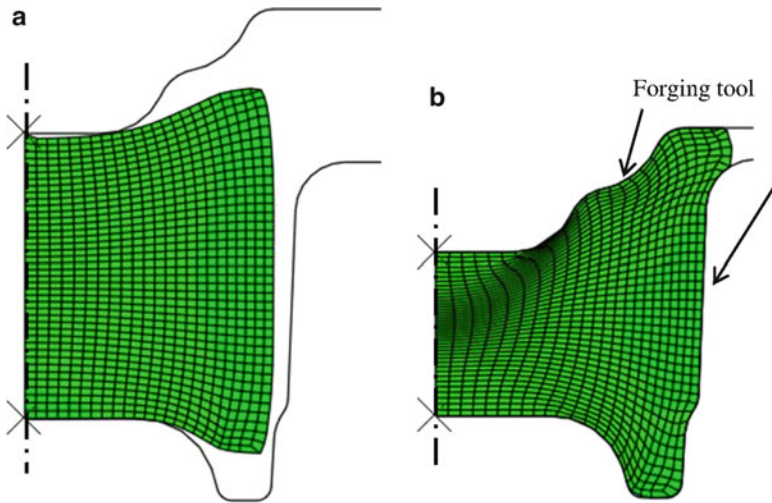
Forging stage using preformed billet and final forging tools. (a) Billet obtained by performing stage. (b) Desired final forged part
